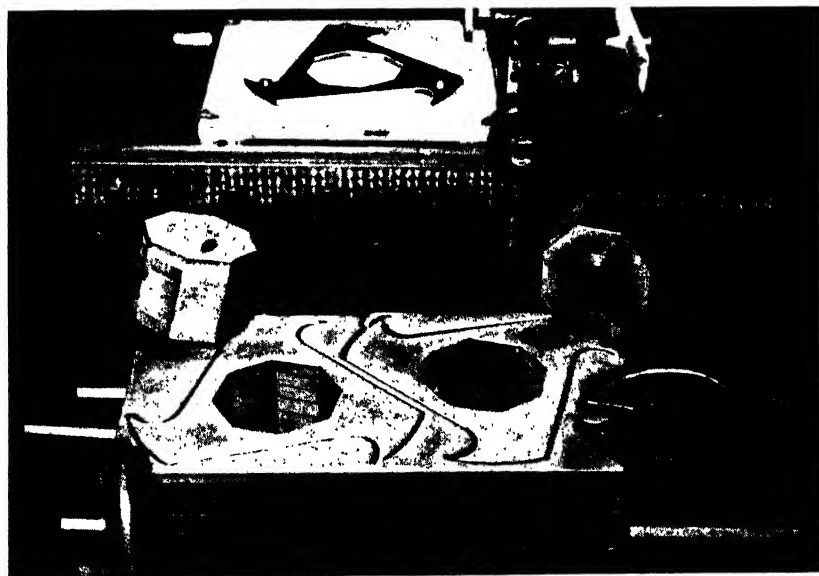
Templet and Stack of Steel Plates with Two Parts Completely Cut Out
